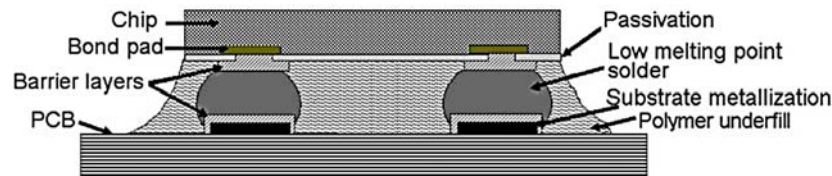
A schematic diagram illustrating an electronics assembly configuration utilising liquid solder interconnections [2.1]
